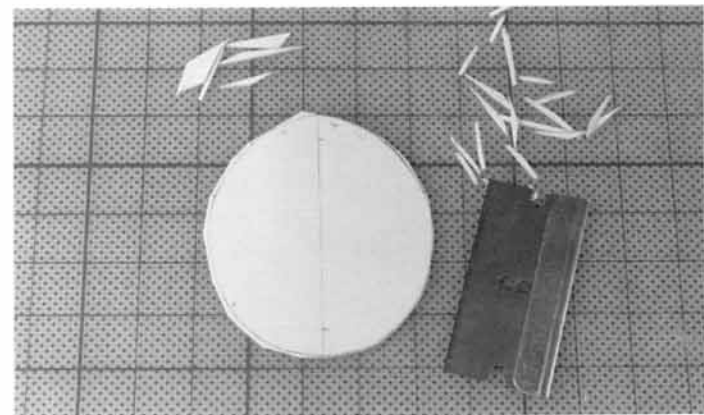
Cut out the full interior shape using a single-edge razor blade, making tangential cuts along the edge of the shape. Form-fit the part into place and use a Flex-I-File sanding stick to adjust and smooth the edges. The contour gauge will get you close, and minor adjustments to the curve of the part should be all that are needed.
